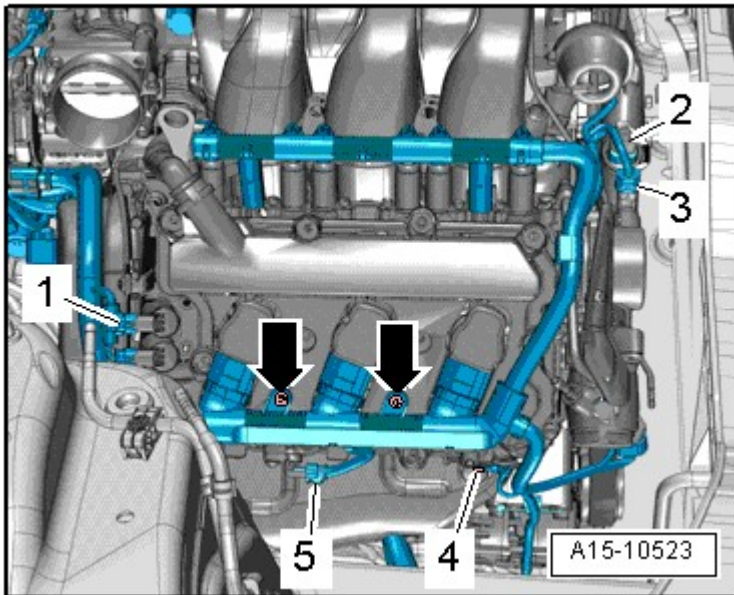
Disconnecting Electrical Connector On Camshaft Position
